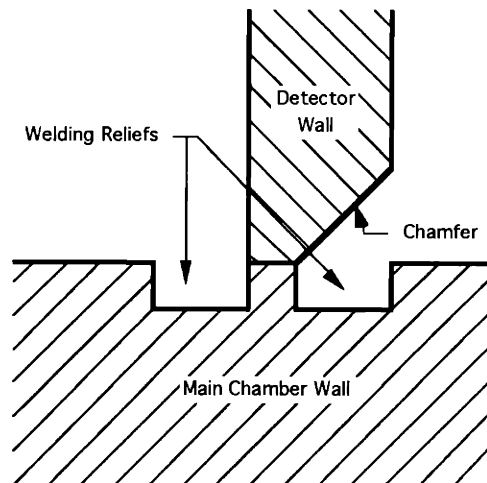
Schematic showing a chamfered detector wall and welding reliefs machined on the main chamber wall.
